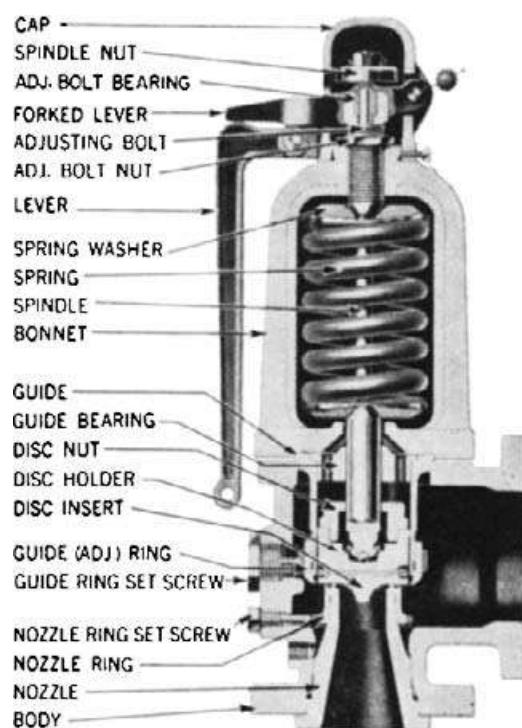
Safety valve. (Courtesy of Crosby-Ashton Valve Co.)
